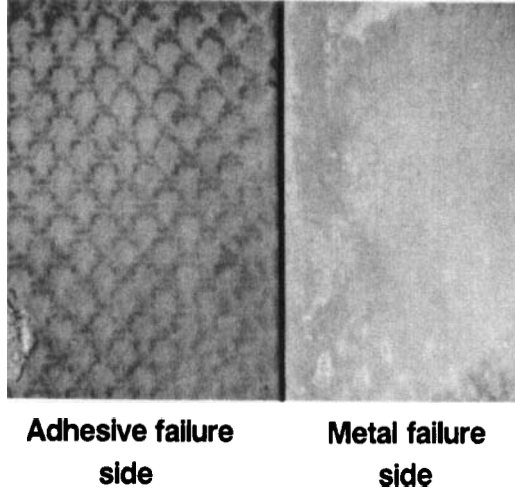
Fracture surfaces of FM-300 bonded aluminum wedge crack specimens.
